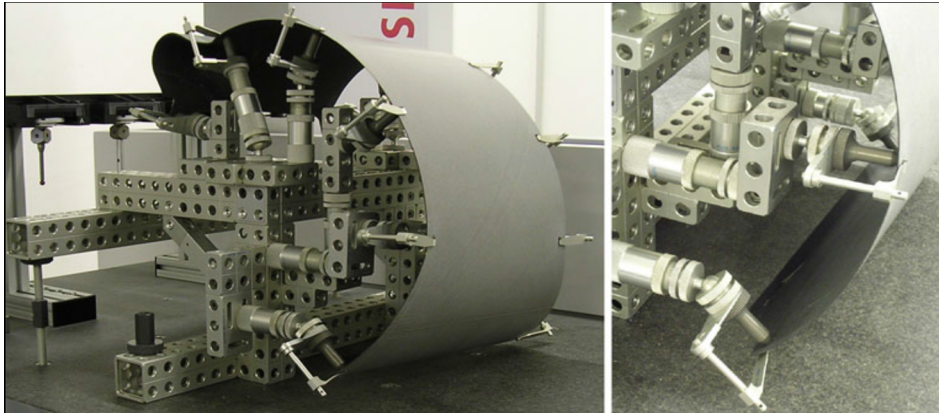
Special, expensive, heavy, and complex fixtures integrated with CMM for inspection of a flexible plate (Ascione and Polini 2010)
